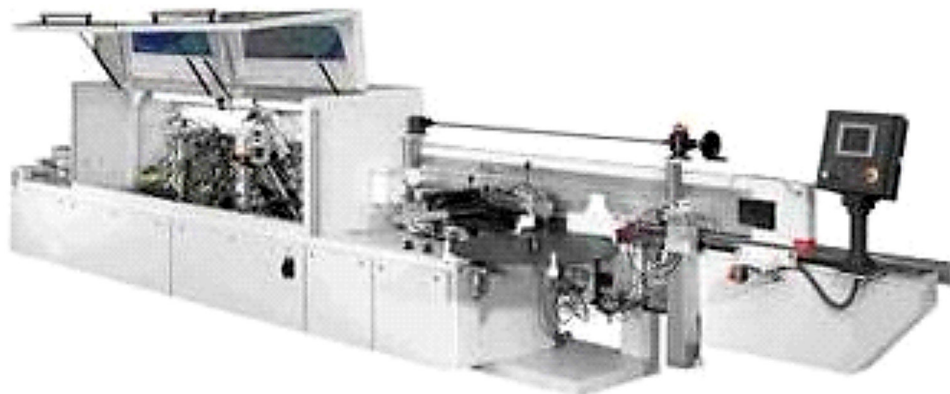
The veneering machine in combination with dimension saw machine view [10]
